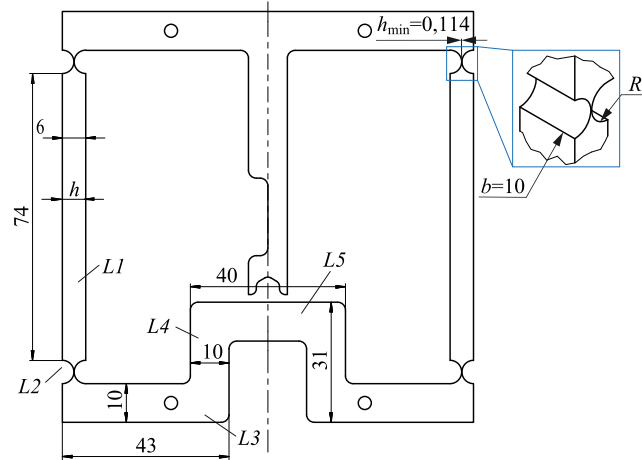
Dimensions of the parallel-guided compliant mechanism.
